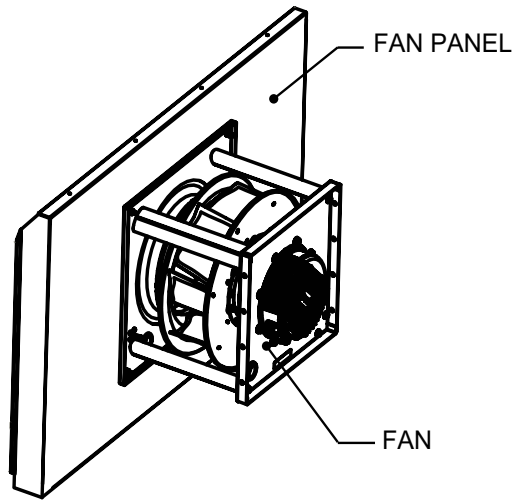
Power Exhaust Assembly (Refer to [Table 36](#))
